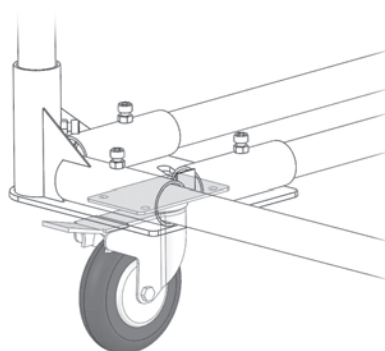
PLATE-TYPE SWIVEL CASTER WITH BRAKE, Ø 100
